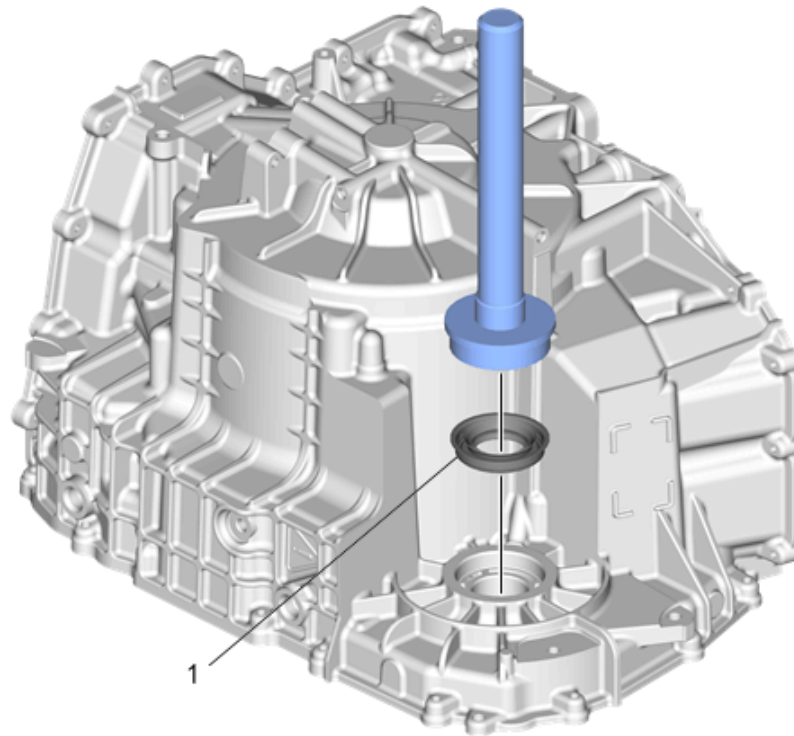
Front Wheel Drive Shaft Oil Seal - Left Side
